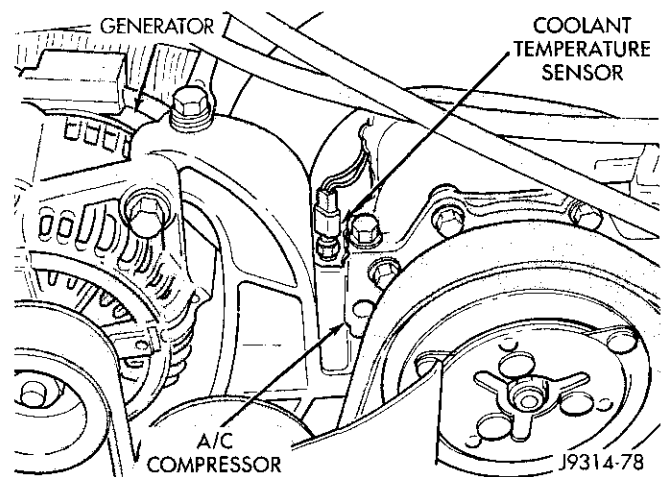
Engine Coolant Temperature Sensor—3.9L/5.2L/5.9L Engines—Typical
